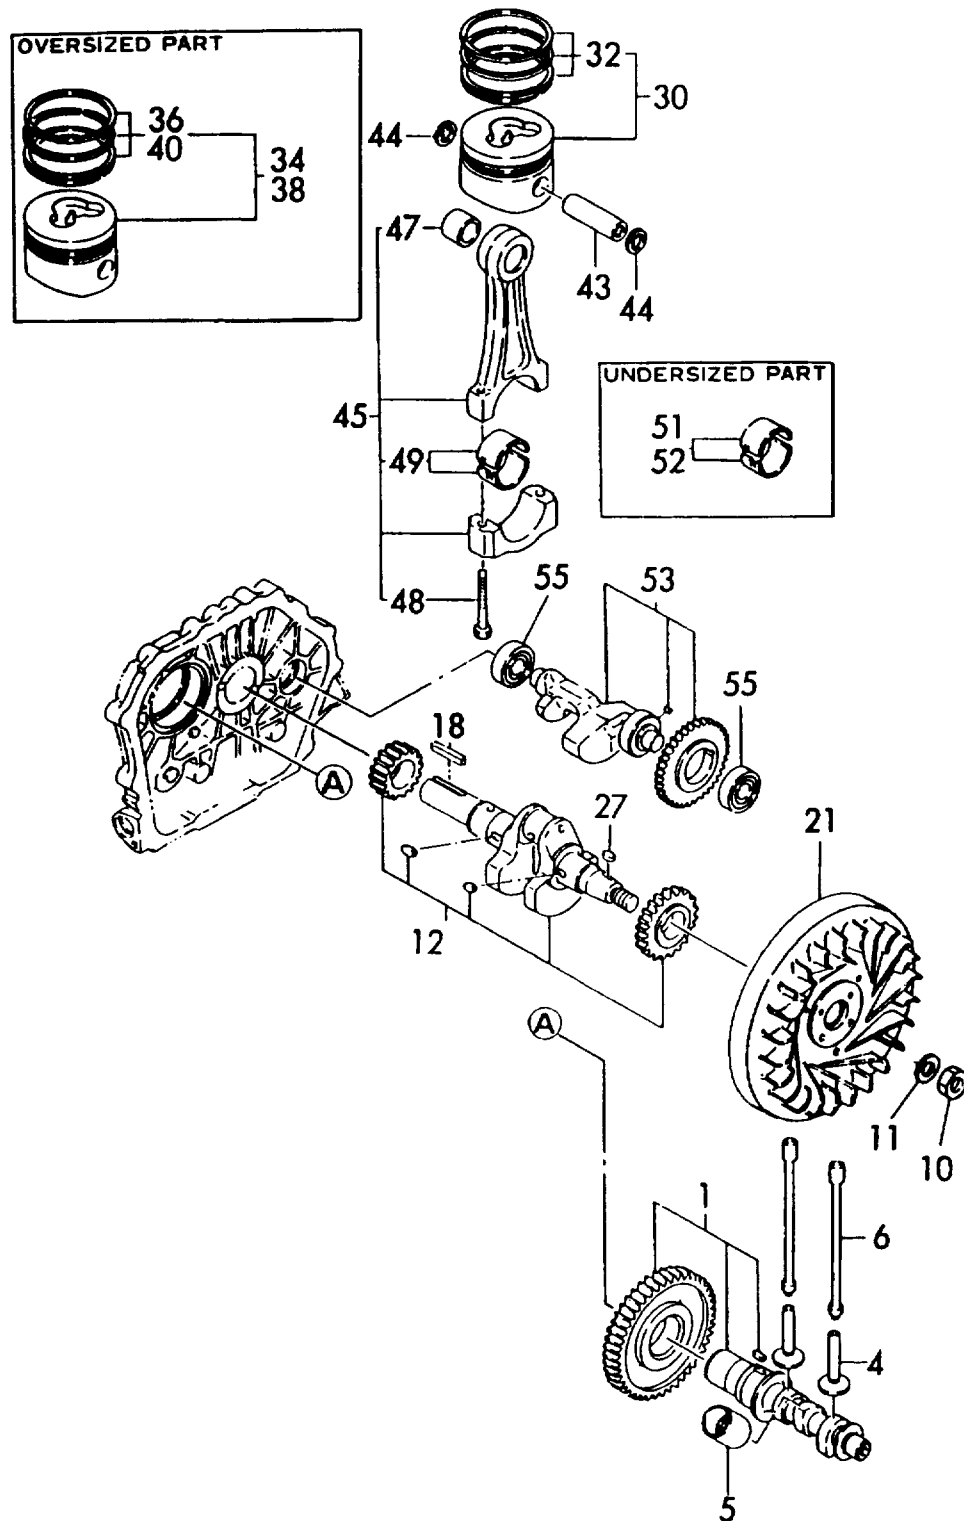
CRANKSHAFT, PISTON, AND CAMSHAFT ASSEMBLY
